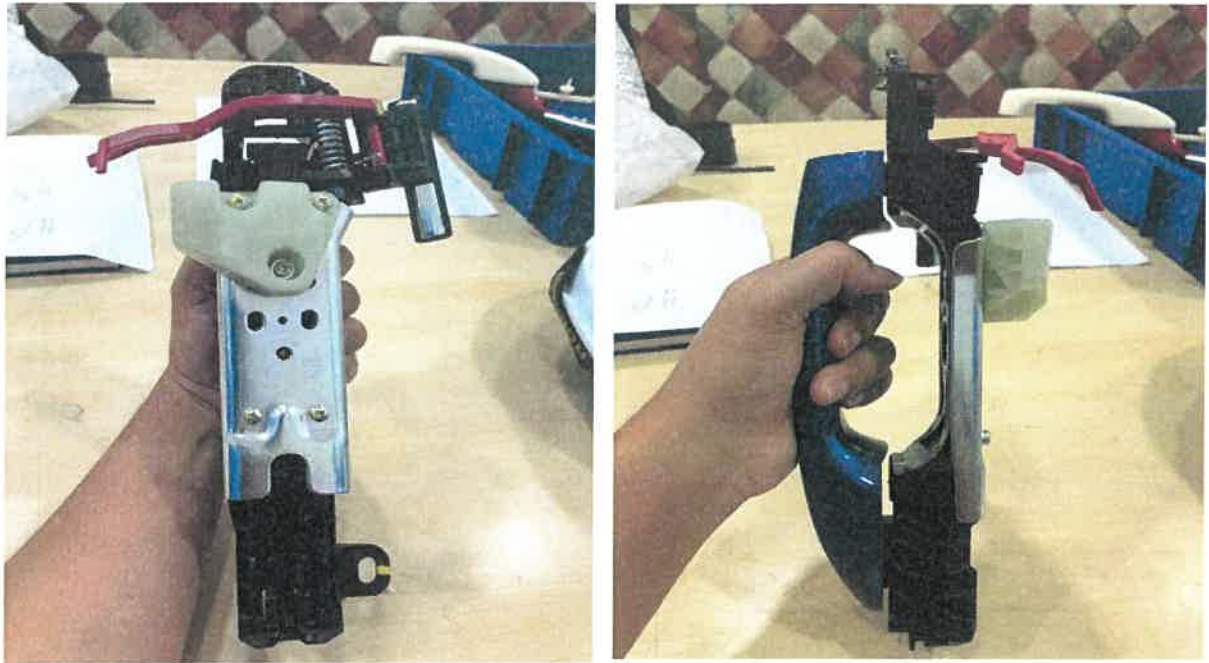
Completely assembled Door Outside Handle (Painted)
